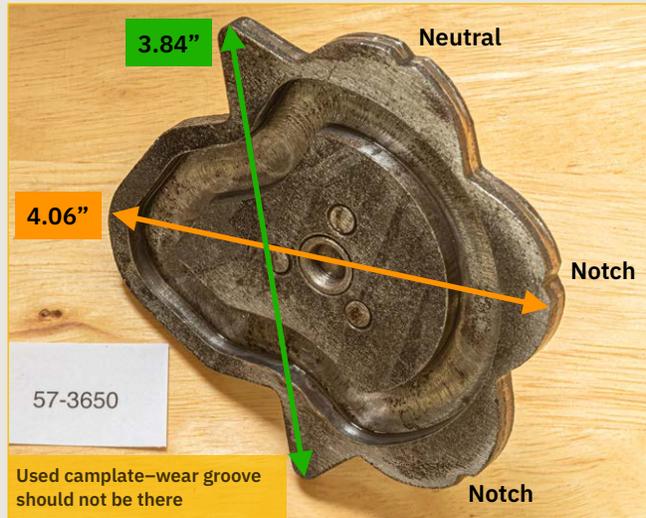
Camplate 57-3650 was used in 1968 and part way through 1969 only—notches between gears were unique to this camplate (see 1970 page for camplate introduced later in '69)
